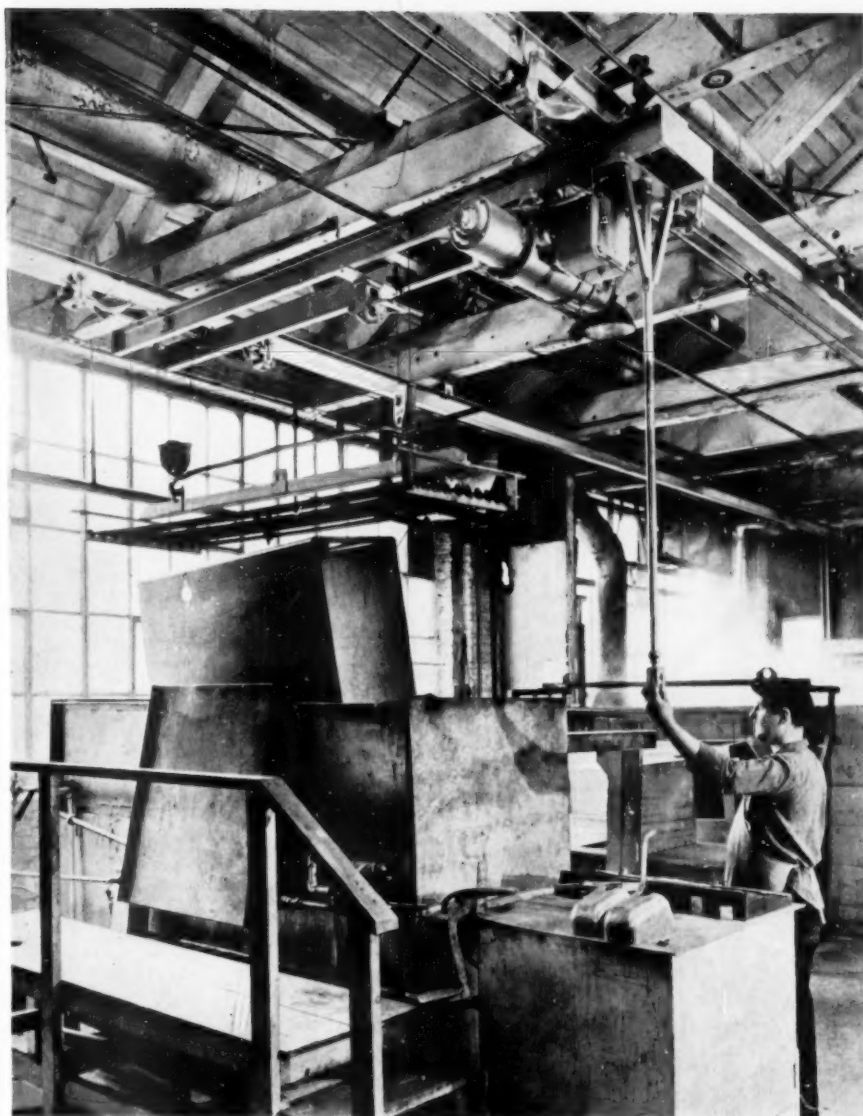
Traveling crane with rack on which pieces are suspended. By means of a push-button control, the pieces are dipped into the degreaser, Bonderizing and rinse tanks. (Courtesy Chicago Tramrail Co., Inc.).
